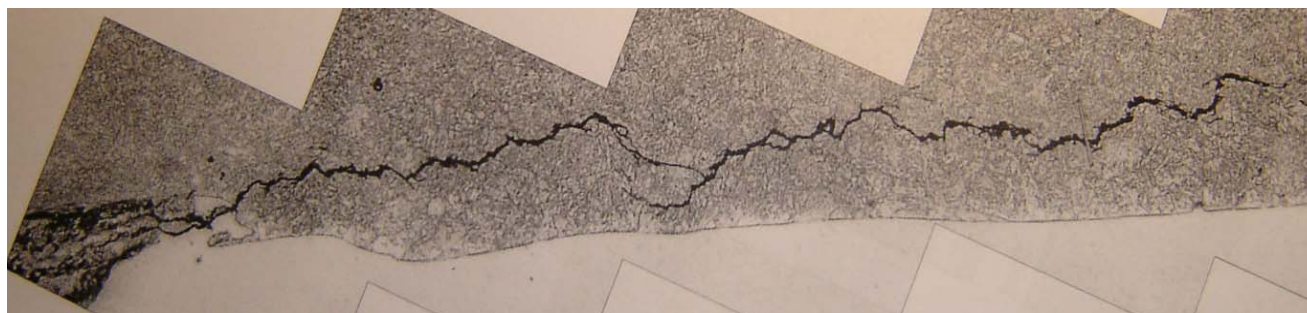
Microcracks in the HAZ of the connector welded joint.
